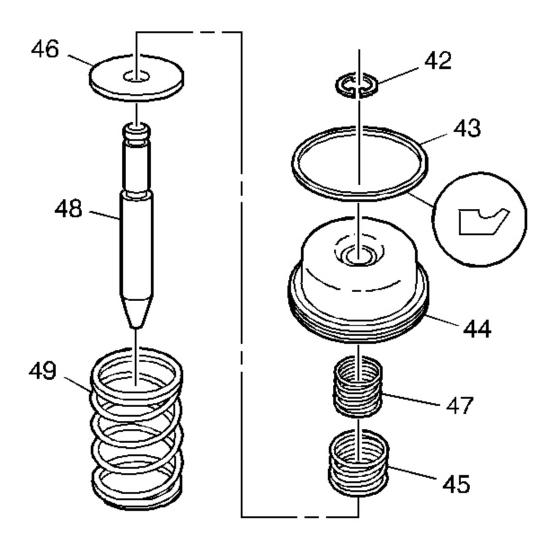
View Of Reverse Band Servo Assembly Components Courtesy of GENERAL MOTORS CORP.
